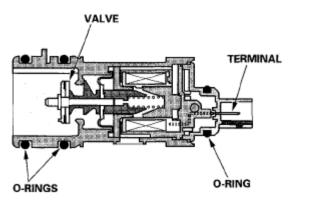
Identifying EVAP Canister Vent Shut Valve Courtesy of AMERICAN HONDA MOTOR CO., INC.
